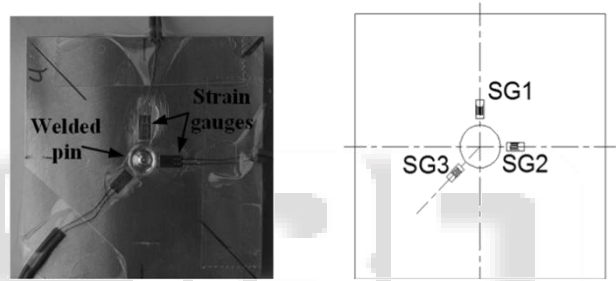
Samples preparation with strain gauges around the welded pin
